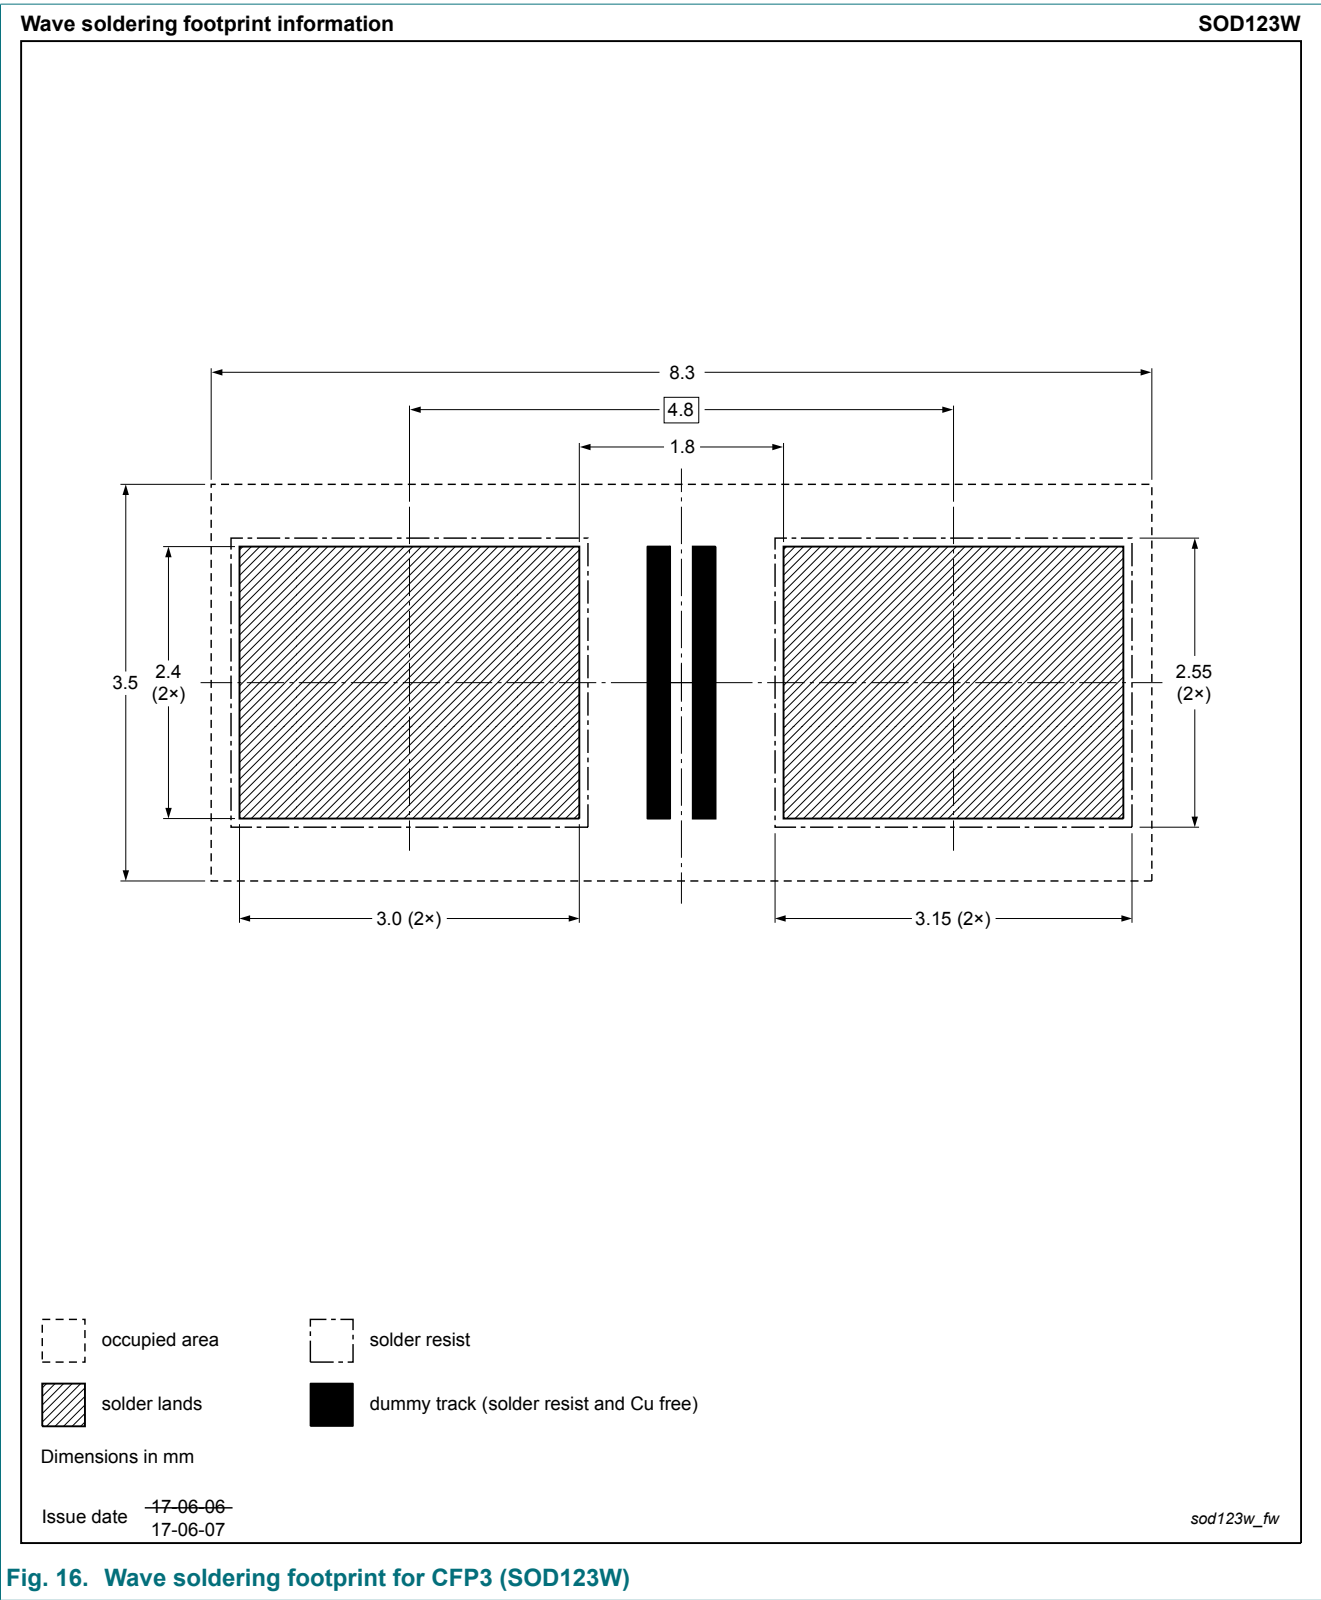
Wave soldering footprint for CFP3 (SOD123W)
